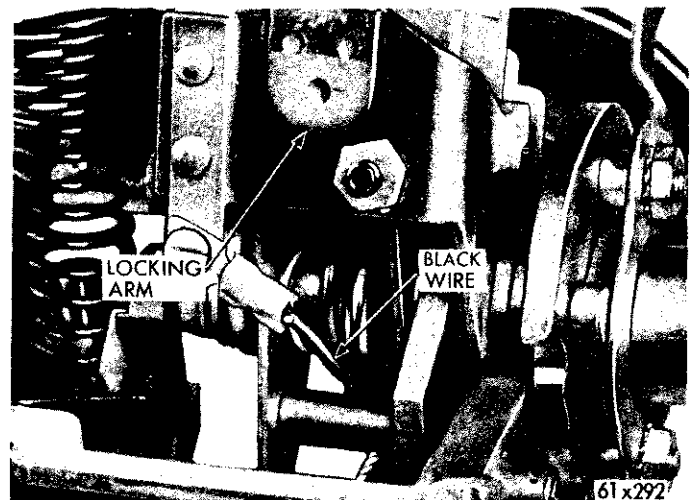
Remove Black Wire from Locking Arm Contact Point #2
